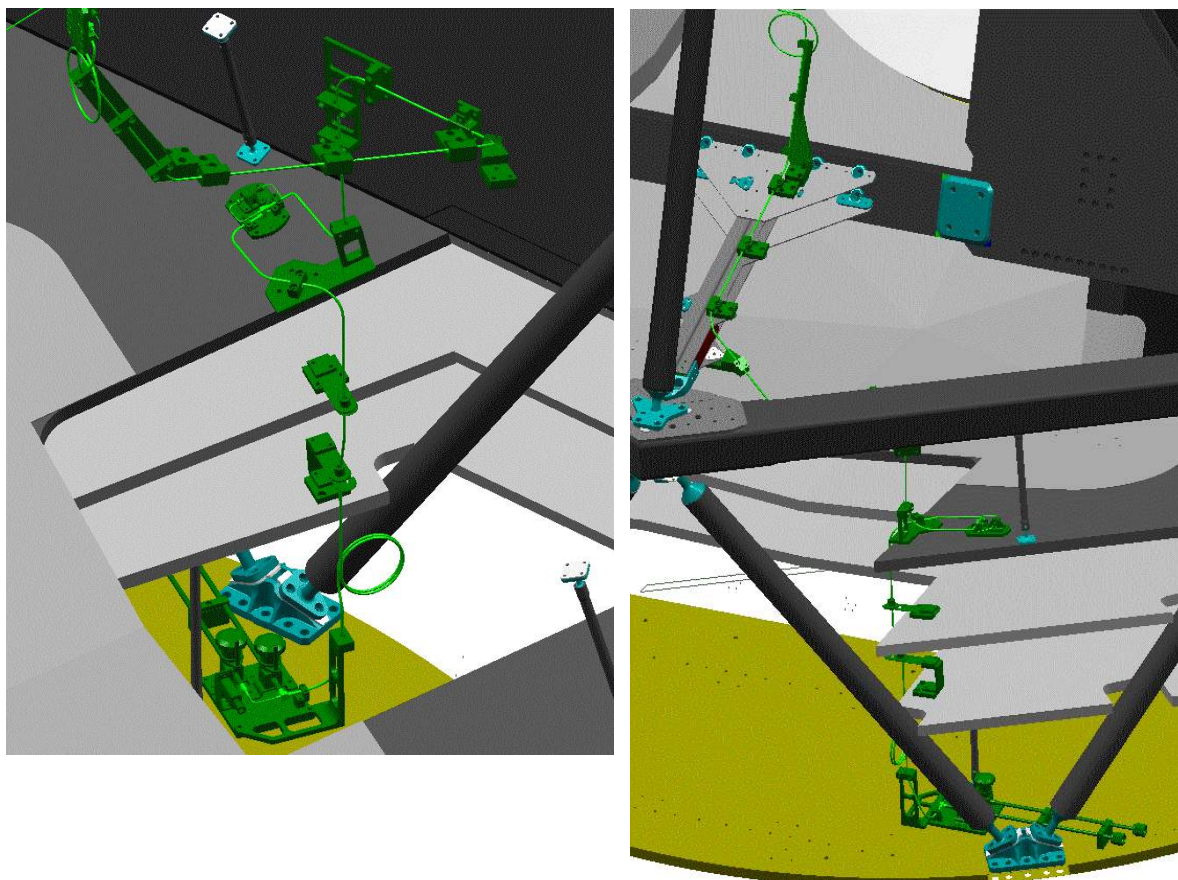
4K cooler pipes mounted on grooves and telescope
